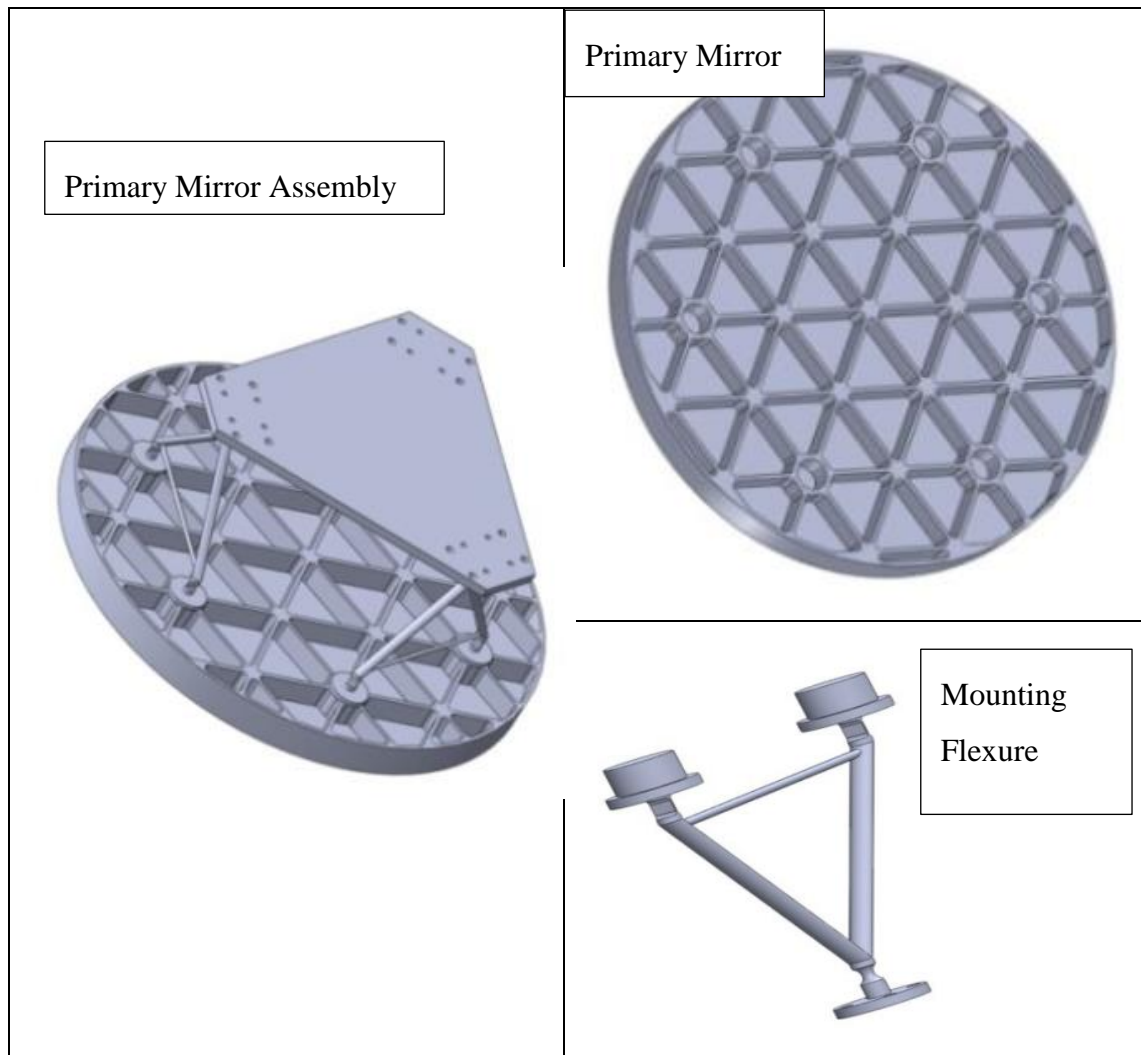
Design of 500mm Primary Mirror Assembly [8]
